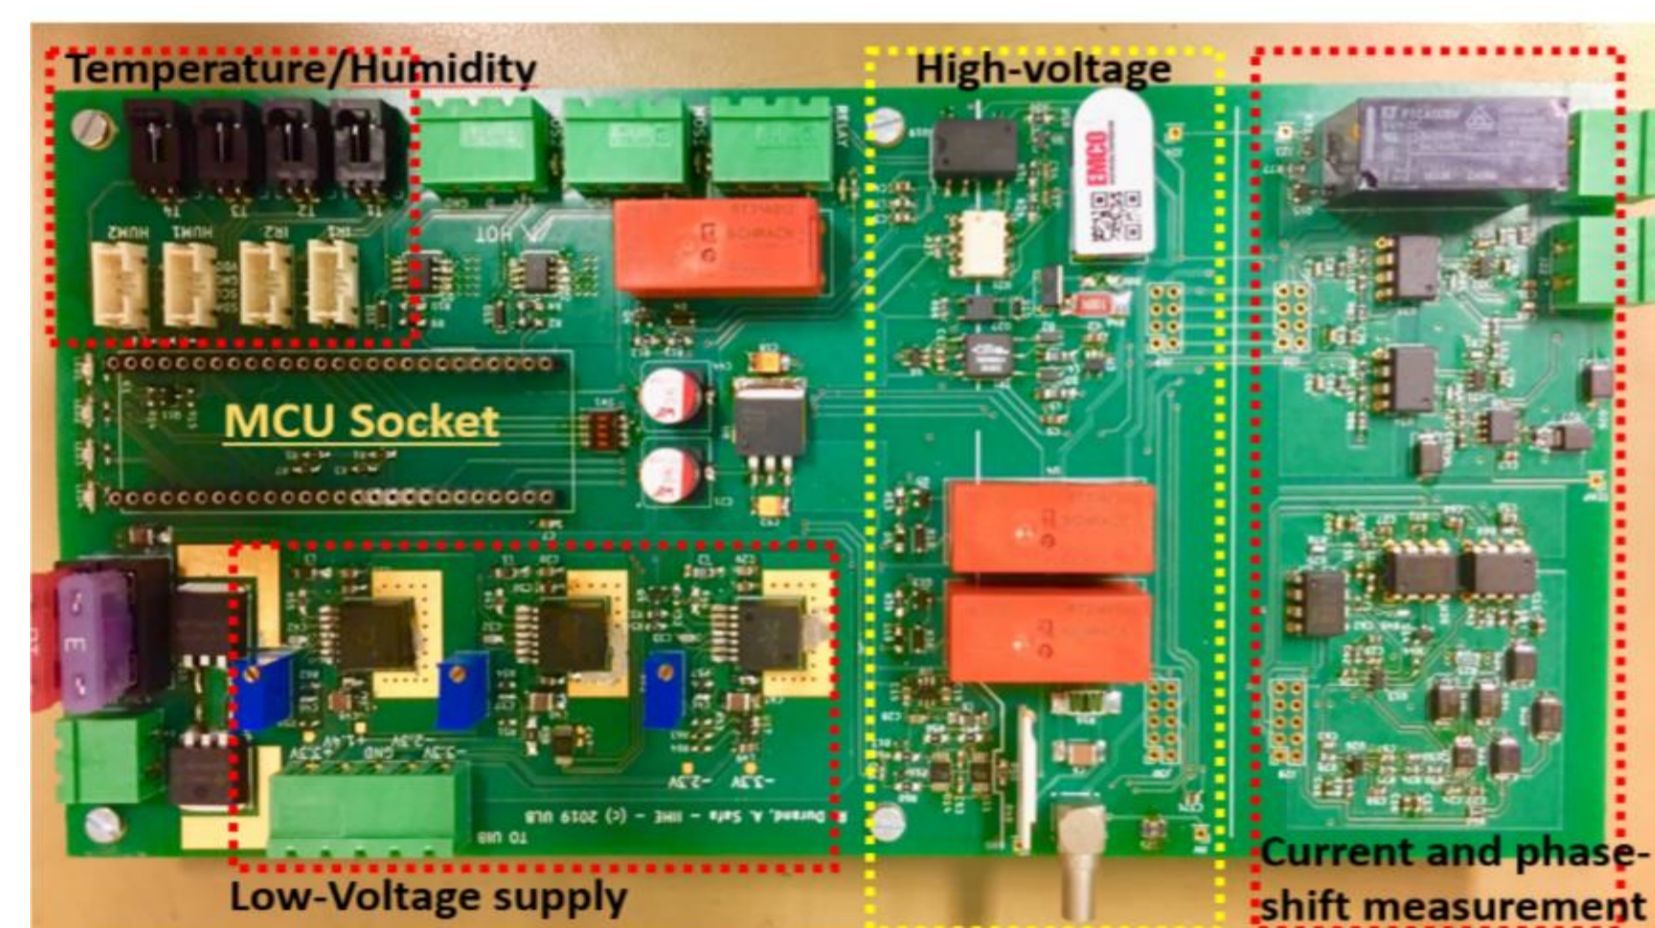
A prototype of the IV/CV board. Dimensions: 30 cm x 15 cm.
